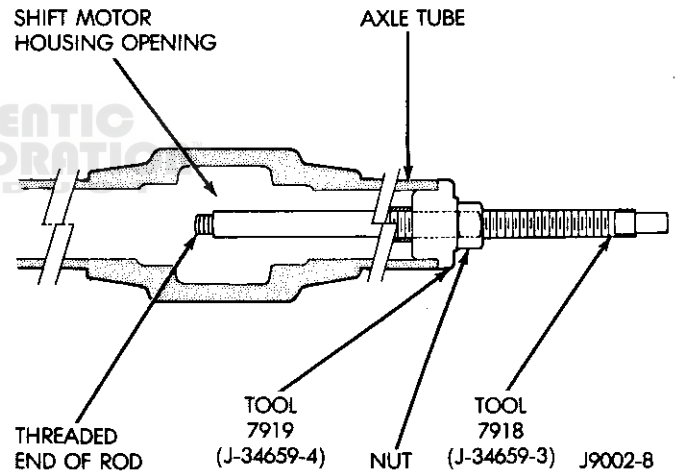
Threaded Rod Tool In Axle Shaft Tube
